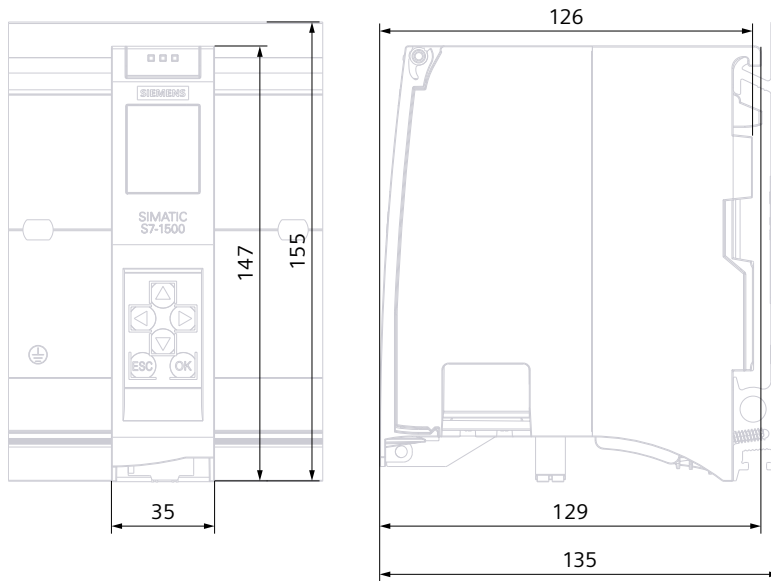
Dimension drawing of the CPU 1513R-1 PN, front and side view
